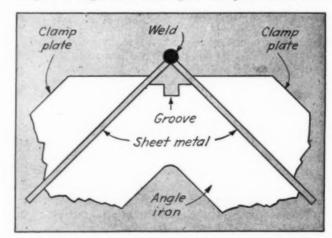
In jigging for square corner welds, angles used to back the joint should be grooved to insure penetration. This groove is ½ in. wide and 3/16 in. deep.
